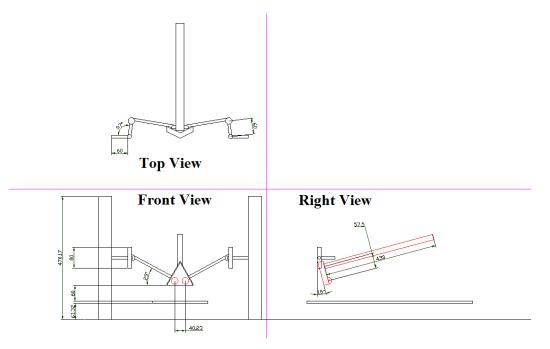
Final Dimensions for the Linkage of Steering Mechanism
